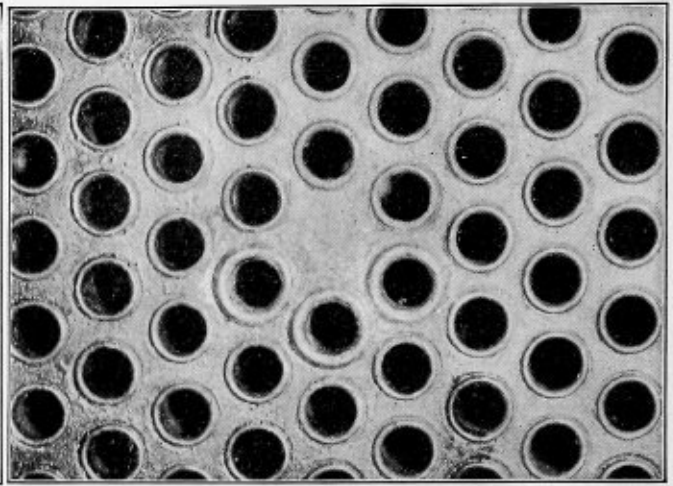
WELDED TUBES AFTER BEING CHIPPED AND TRIMMED
